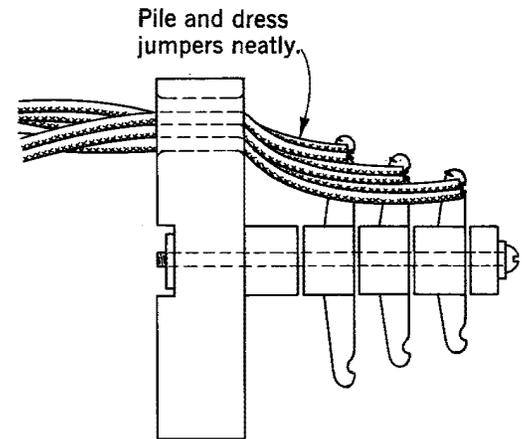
Permanently Bridged Cross Connections on No. 35 or Similar Type Terminal Strip, without Back Notch Terminals
